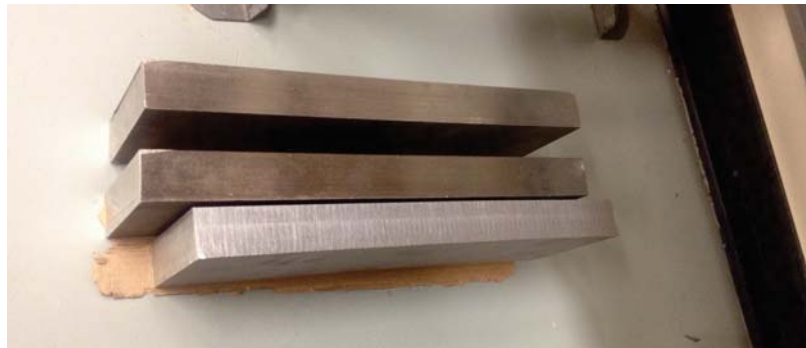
Raw stock of Stainless Steel 304 blocks before machining. Stocks rectangular cuts were performed by a water-jet machine, and the rest of the details was precision machined with a CNC.
